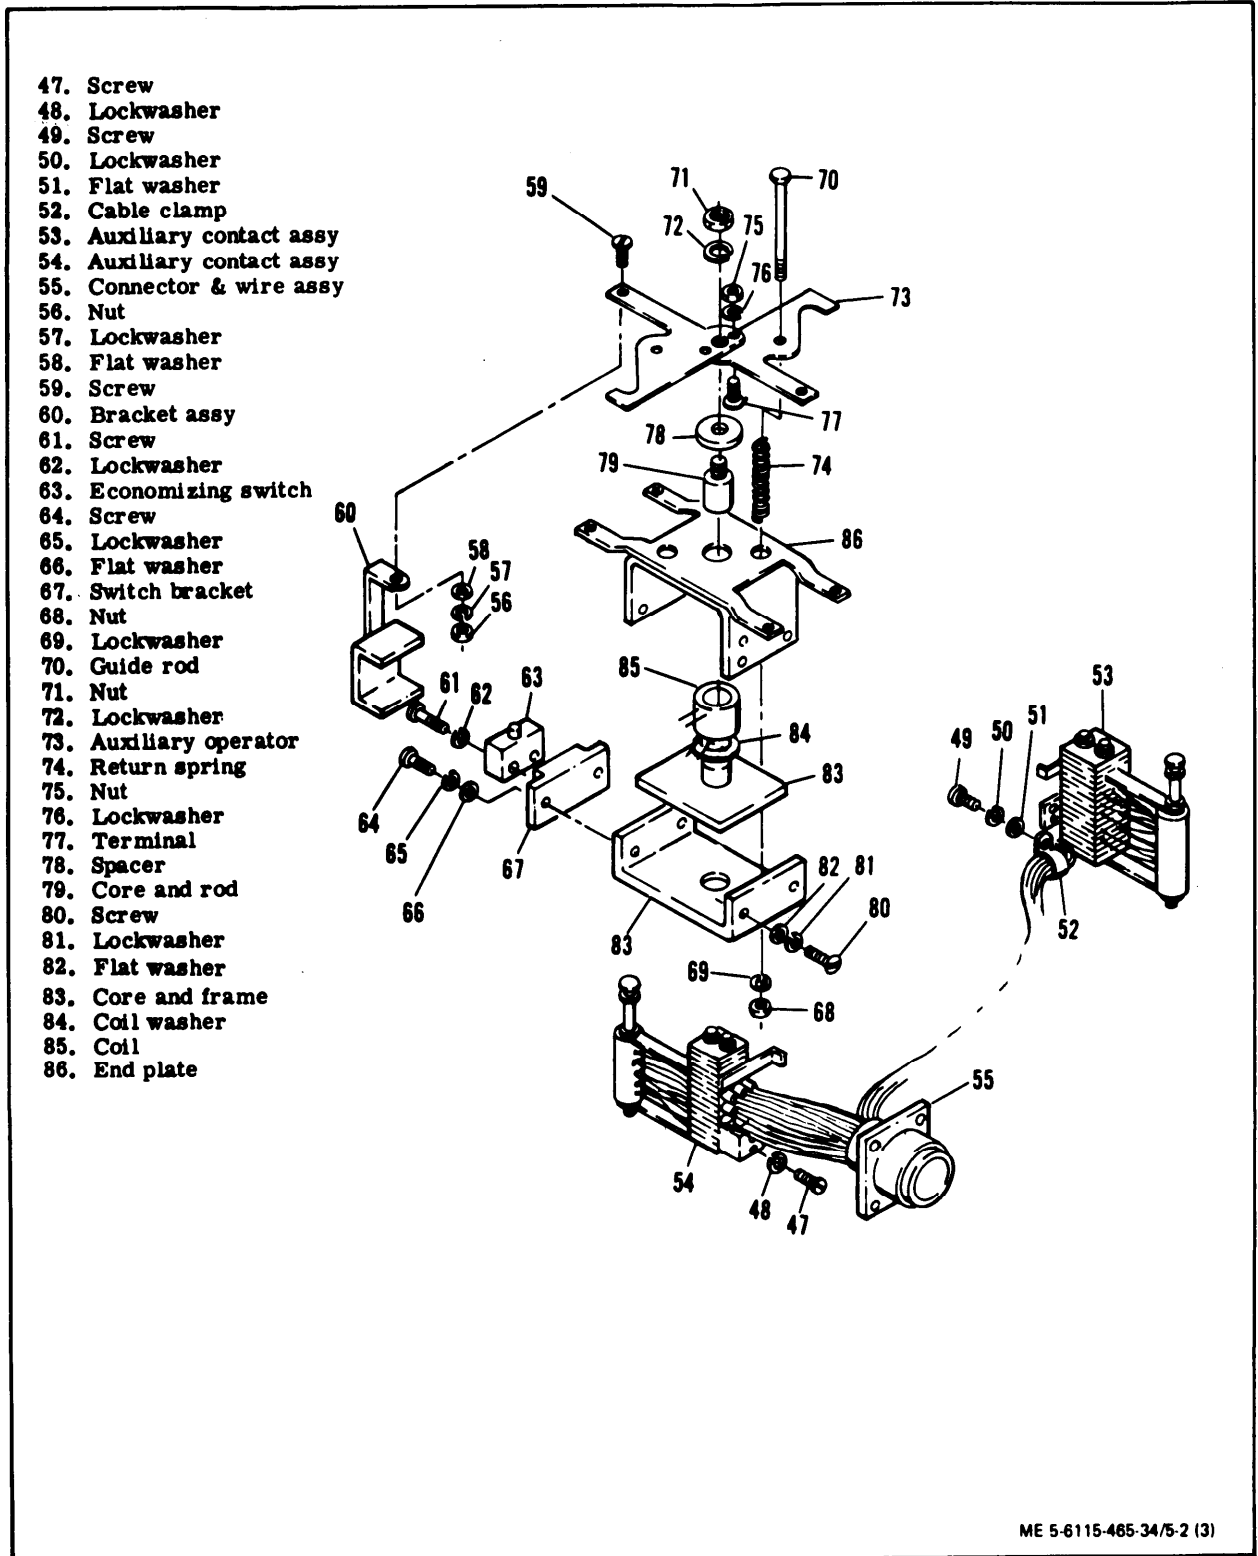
Main Load Contactor, Exploded View (Sheet 3 of 3)
